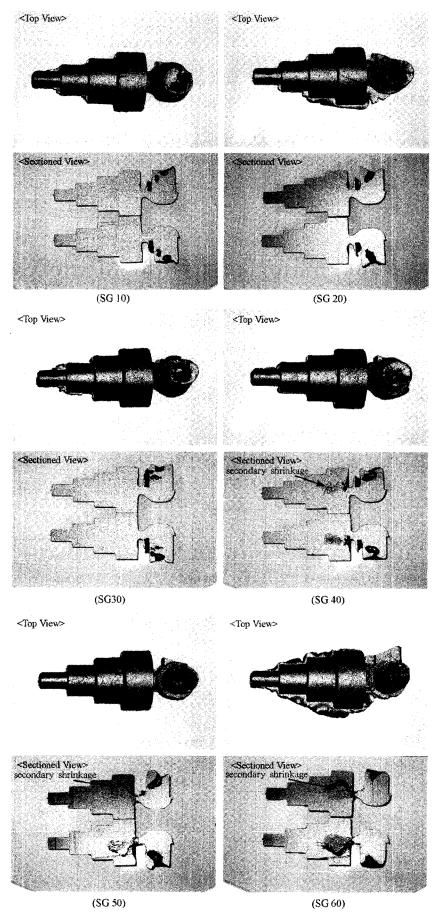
Top and sectioned views of the six specimens in the No. 2 risering design.
